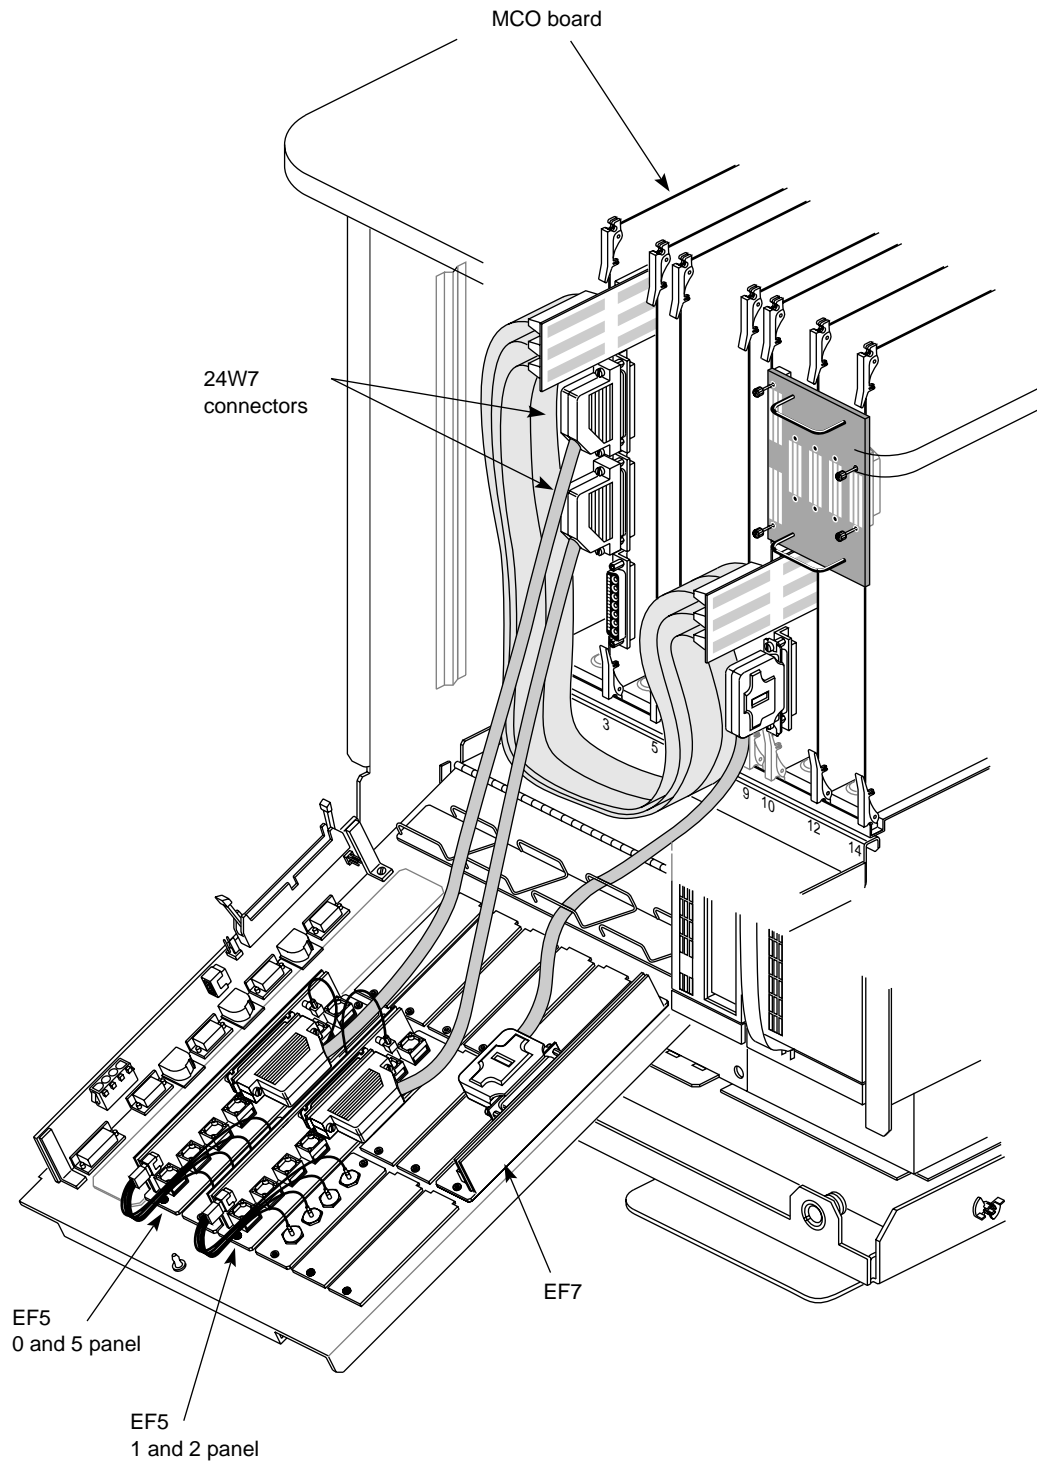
Complete Multi-Channel Option Installation for the Crimson Chassis shows all boards, cables, and panels installed in a POWER Series chassis Figure 2-21.
